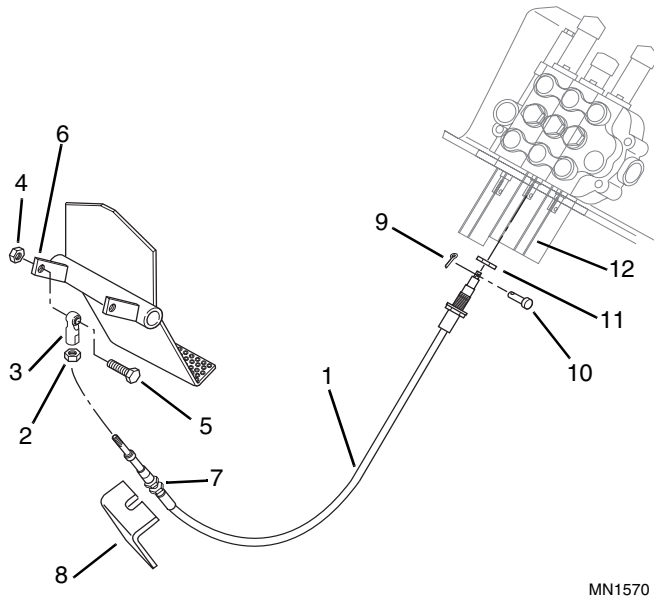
Foot Pedal Cable (Right Side Shown)
